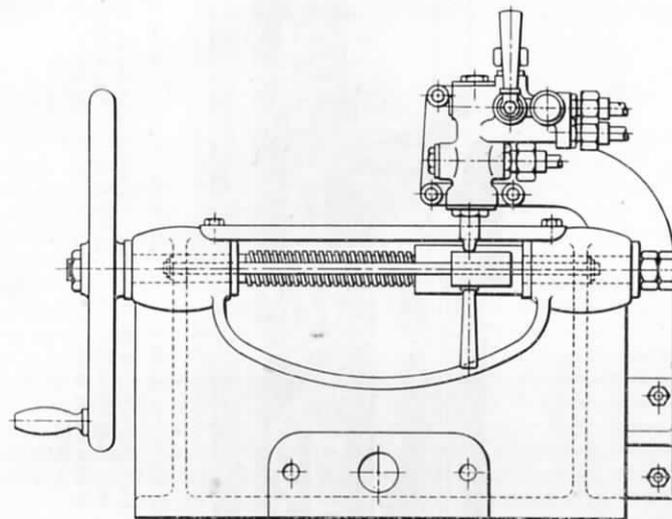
TYPICAL BOOSTER CONTROL LATCH ARRANGEMENT AS USED WITH SCREW REVERSING GEAR.
